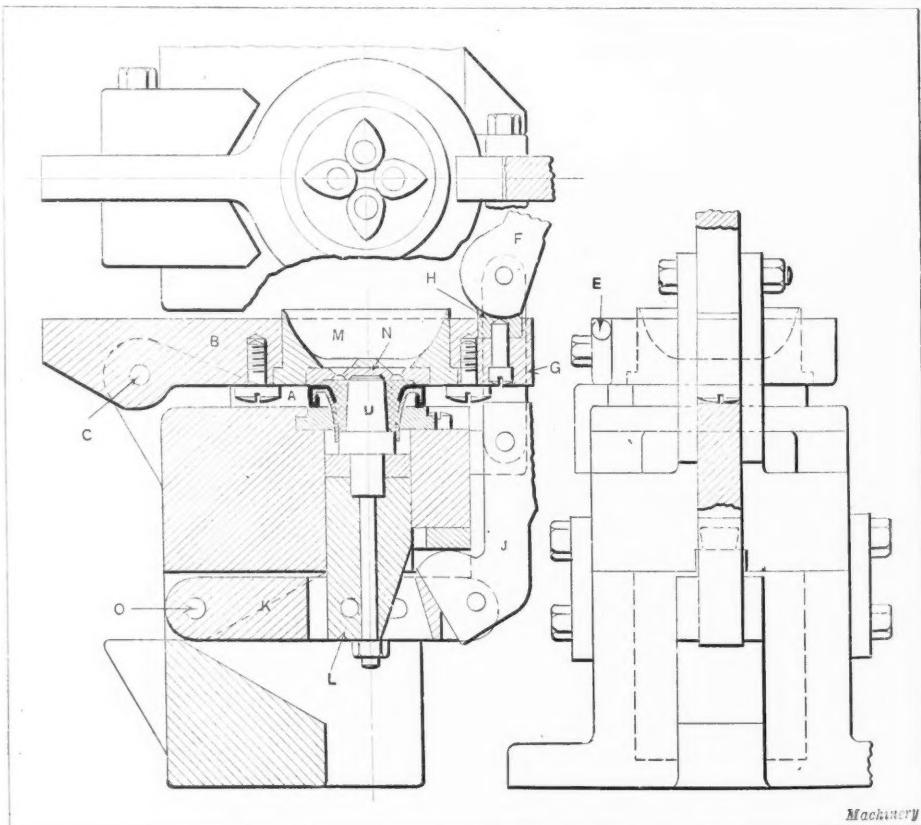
One of Five Molding Units mounted on a Continuously Rotating Table for casting the Alloy Center in the Hub
